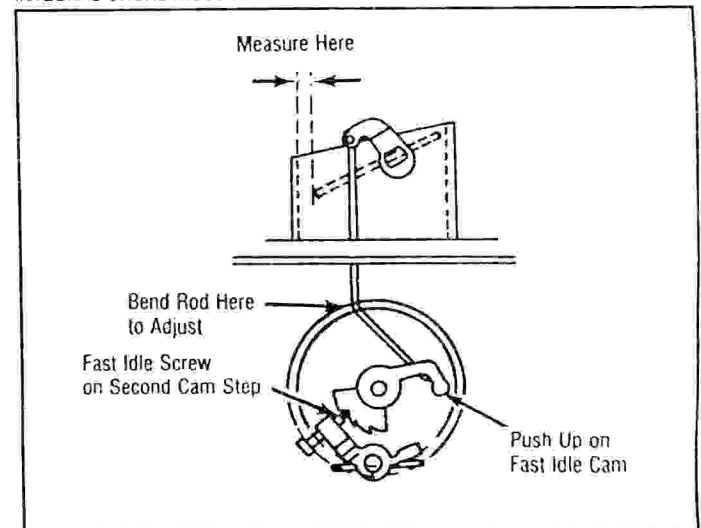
Fast Idle Cam Adjustment (Integral Choke Models)
